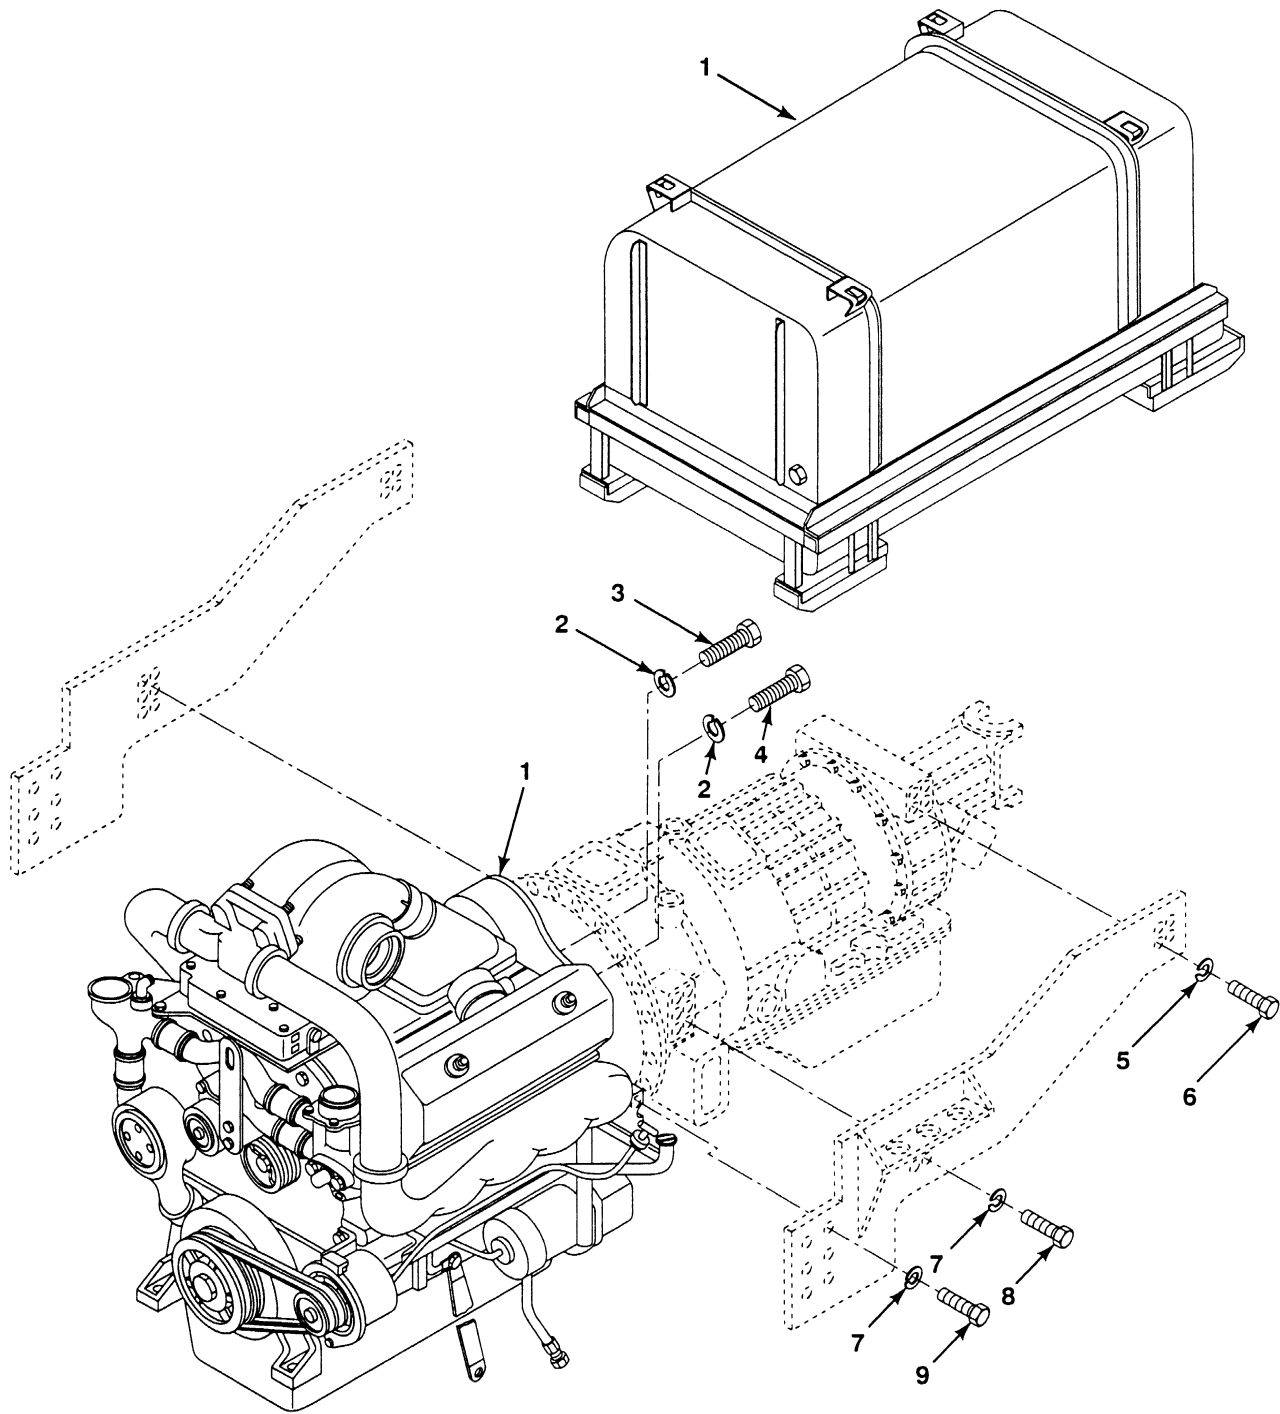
DRESSED ENGINE ASSEMBLY WITH CONTAINER
